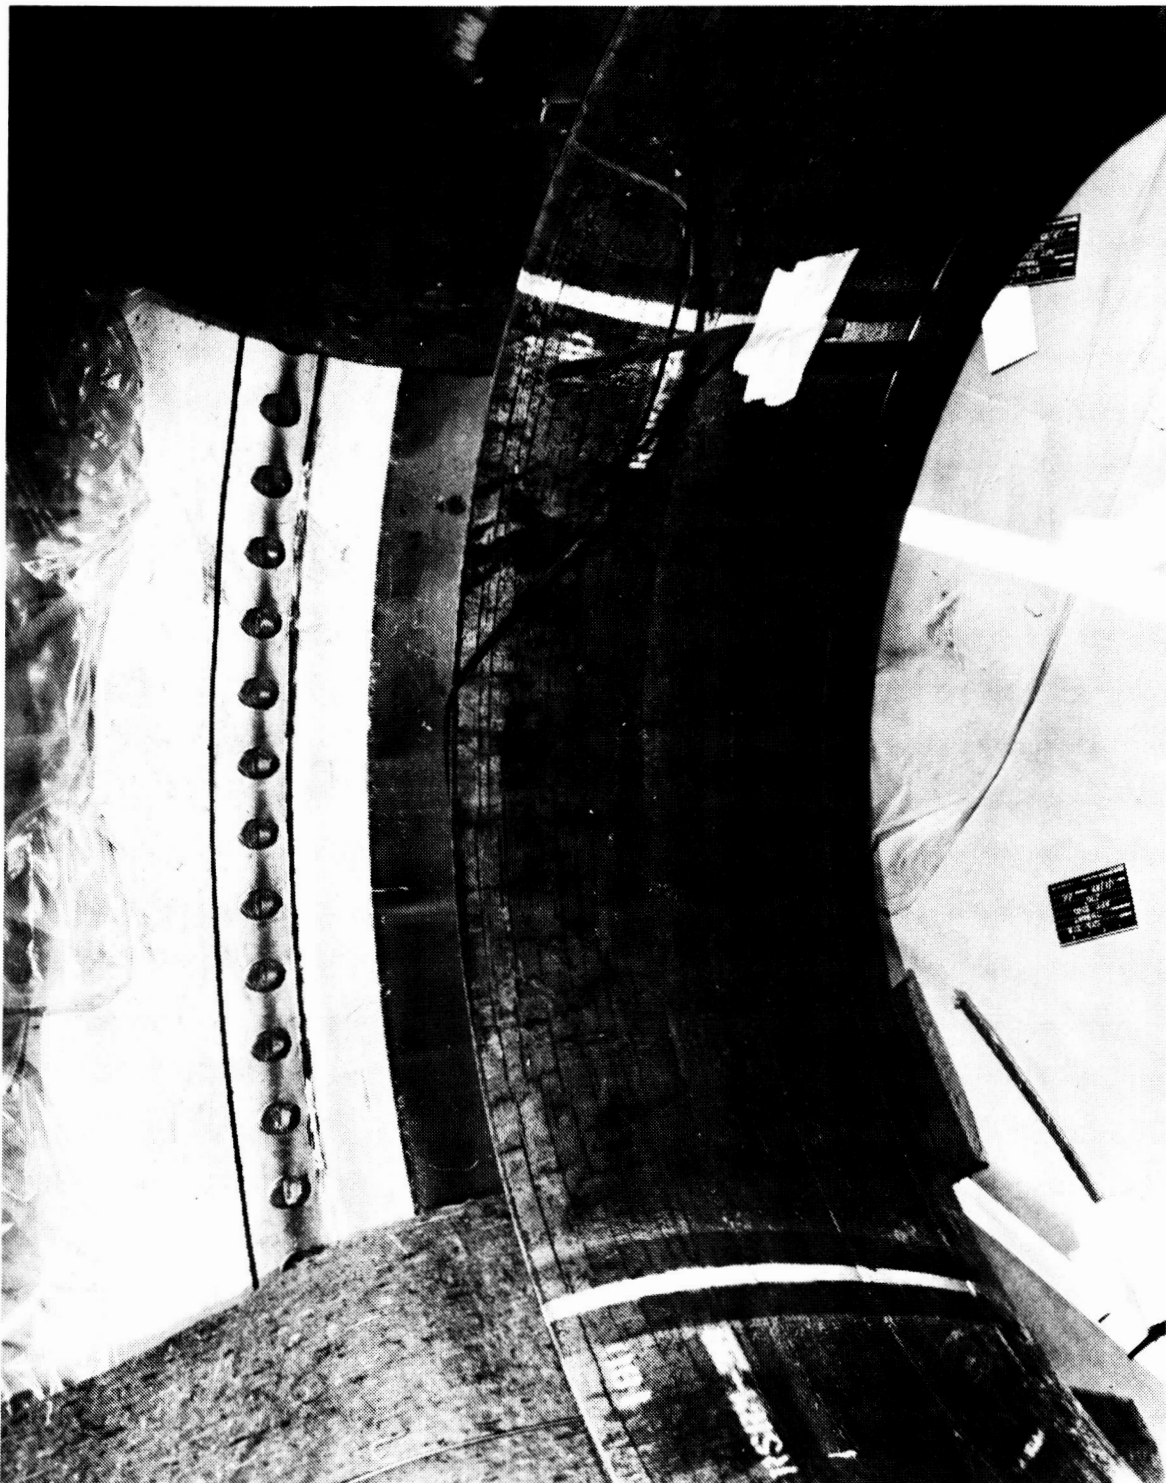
STS-27B Throat Assembly (90 to 180 degrees)
